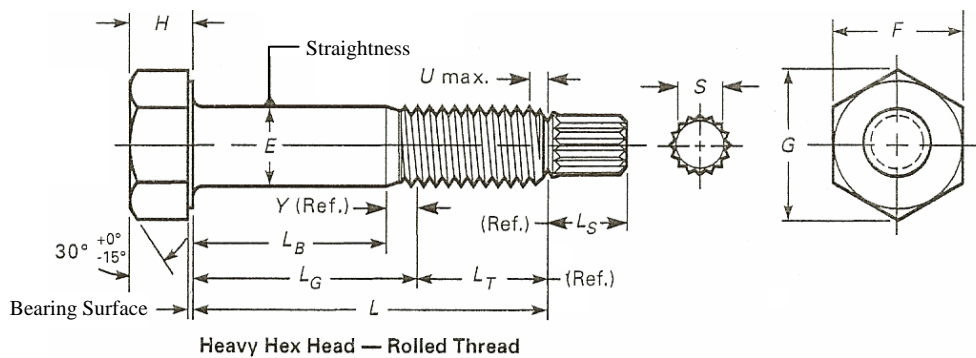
Tension Control Bolt Dimensions with Heavy Hex Head (ASME B18.2.6 2006)
